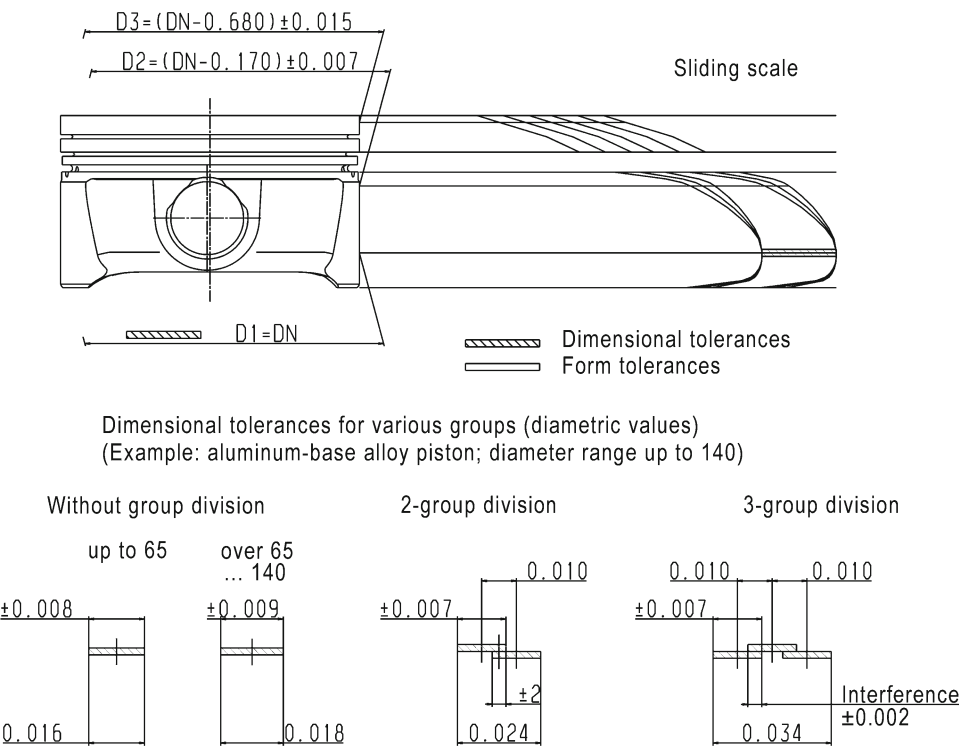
Piston profile, dimensional and form tolerances
